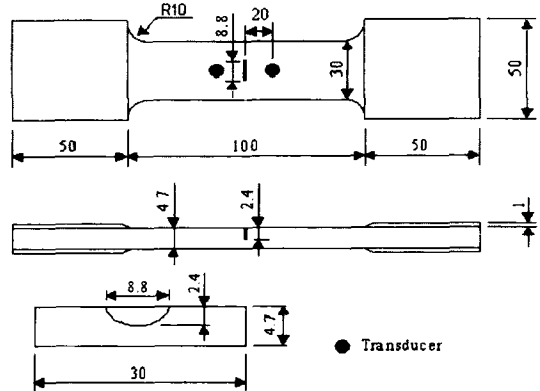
Geometry of the test specimen. All dimensions are in millimeters
